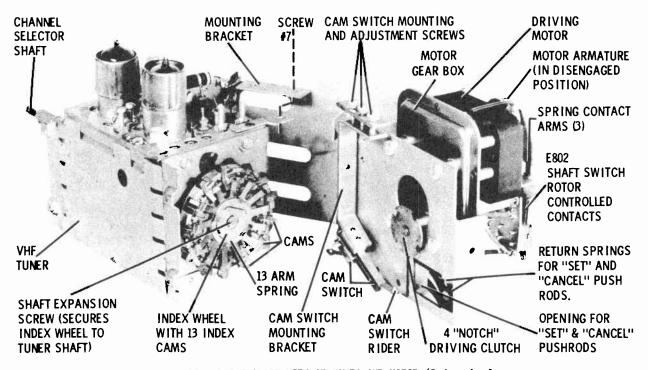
BREAK-APART VIEW OF TUNER AND MOTOR (Index wheel, cam switch and drive wheel are visible).
